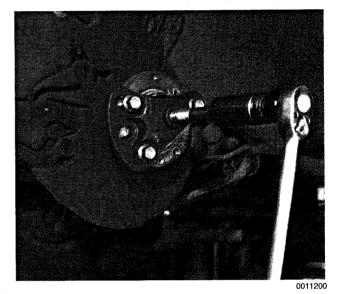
Wheel hub with integral wheel bearing being removed using a puller.
